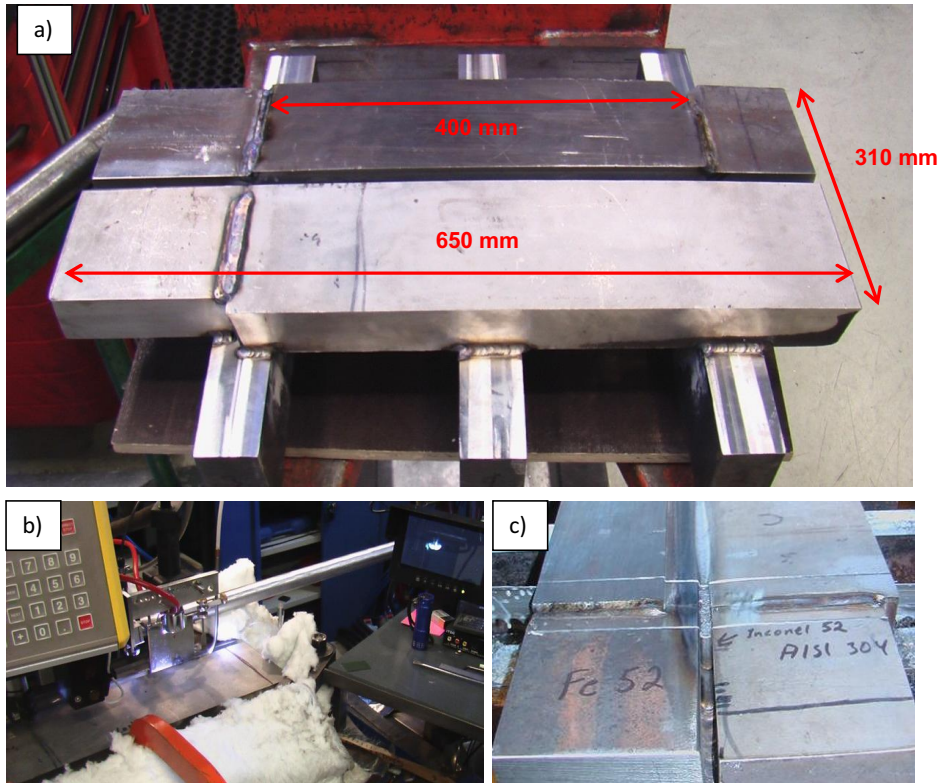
Views of the Alloy 52 mock-up weld manufacturing, with a) the two base metal plates, b) the NG-GTAW welding torch in process (note the leading camera needed to see inside the groove) and c) the final weld.
